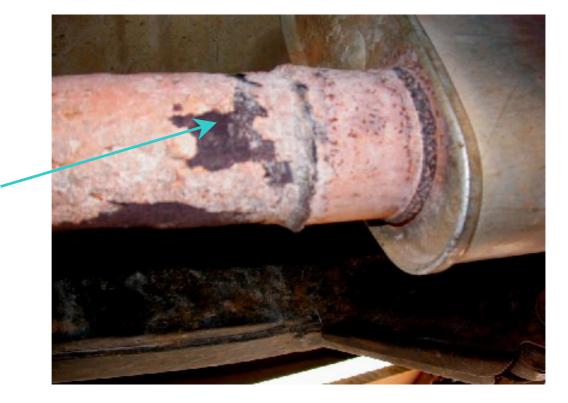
Location of leak on main exhaust pipe immediately adjacent front of non-standard muffler box (arrow). Note condition of weld and extensive corrosion deposit. This hole was used to locate thermocouple channel #5 in exhaust stream.
